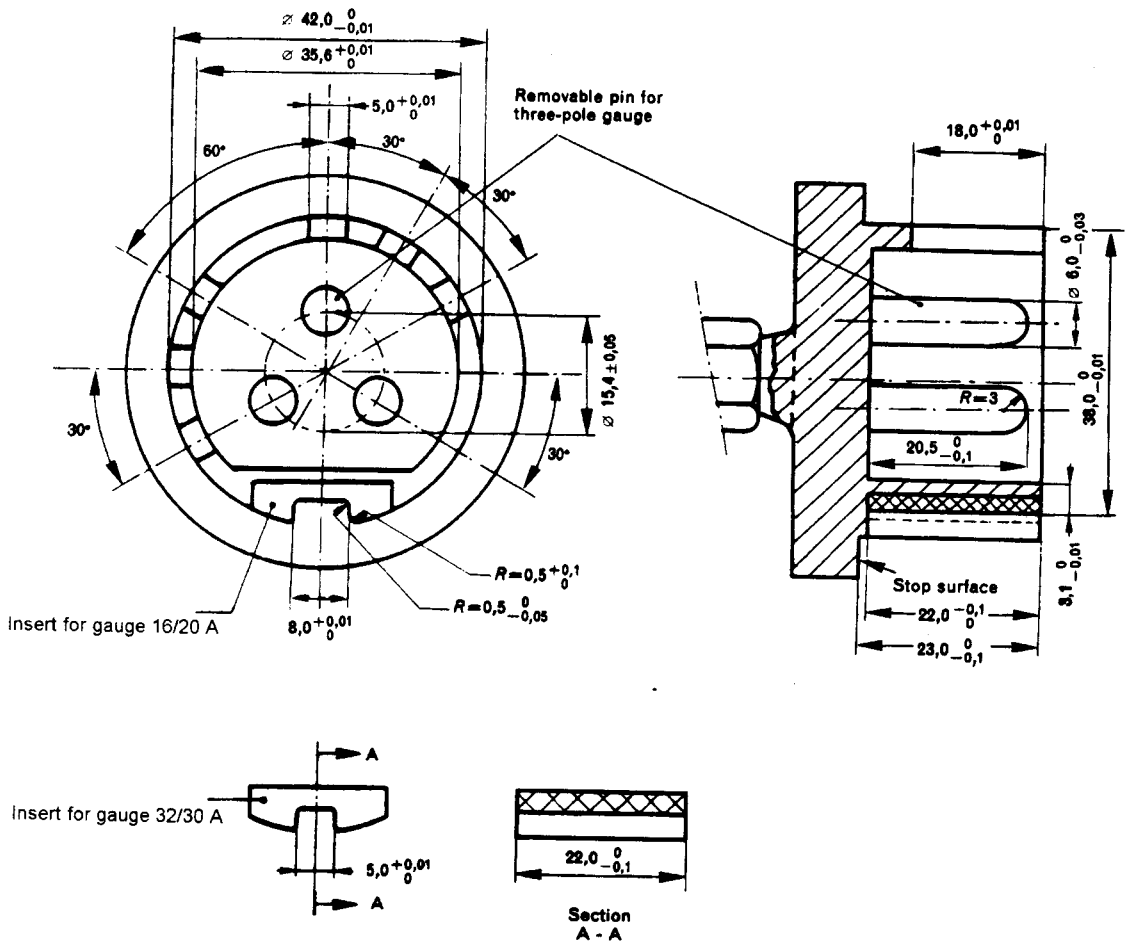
16/20 A, 32/30 A, 63/60 A and 125/100 A plugs and appliance inlets having rated operating voltages exceeding 50 V - "NOT-GO" gauges for checking dimensions d_2 , d_4
